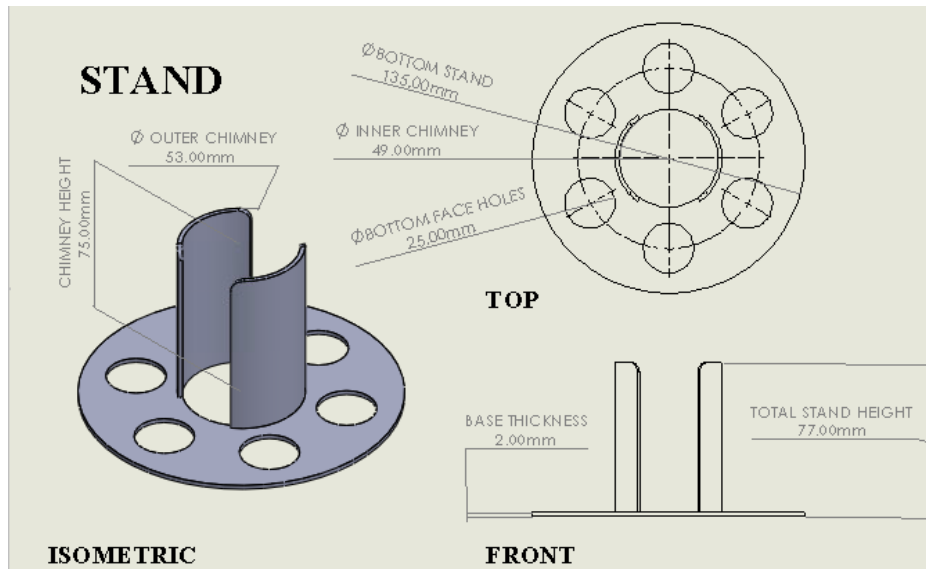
Annotated dimensions of the isometric, front and top view of the stand design.
